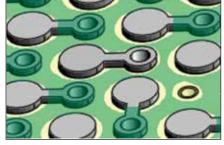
Mill a hole through the board and insert a Teflon sleeve.
